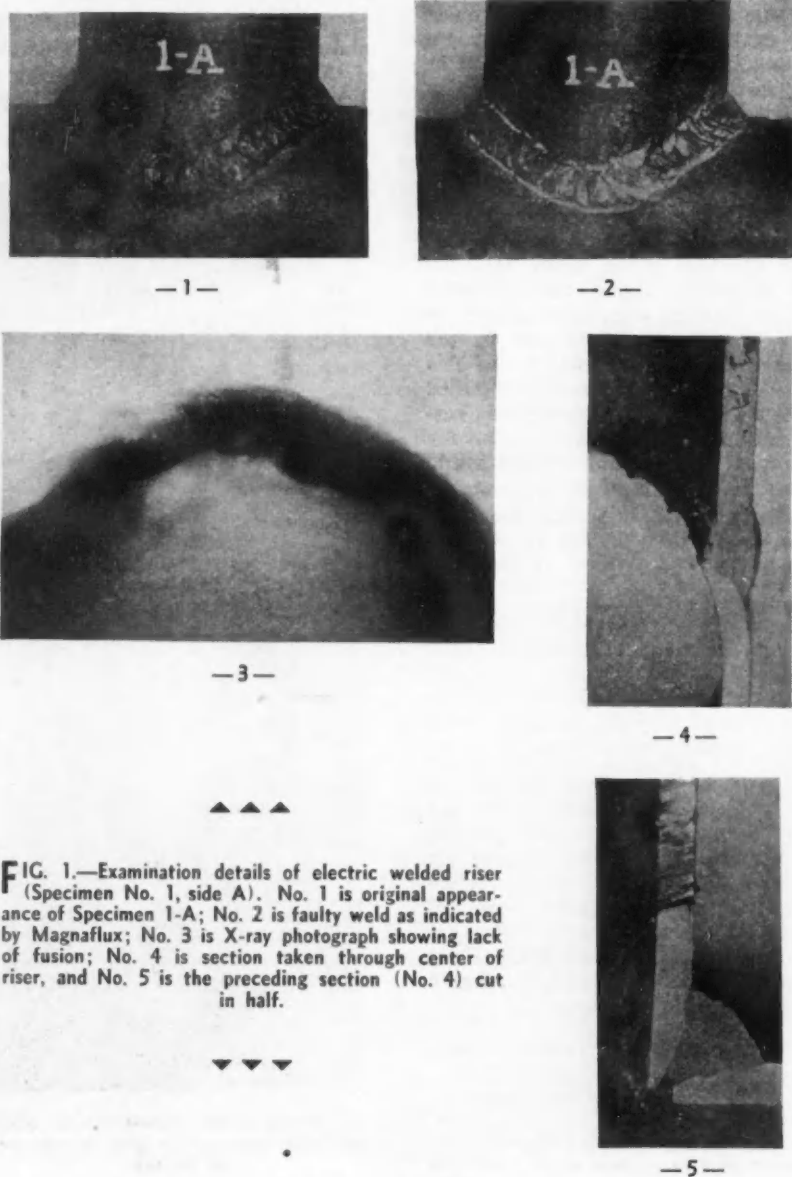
Examination details of electric welded riser (Specimen No. 1, side A). No. 1 is original appearance of Specimen 1-A; No. 2 is faulty weld as indicated by Magnaflux; No. 3 is X-ray photograph showing lack of fusion; No. 4 is section taken through center of riser, and No. 5 is the preceding section (No. 4) cut in half.
